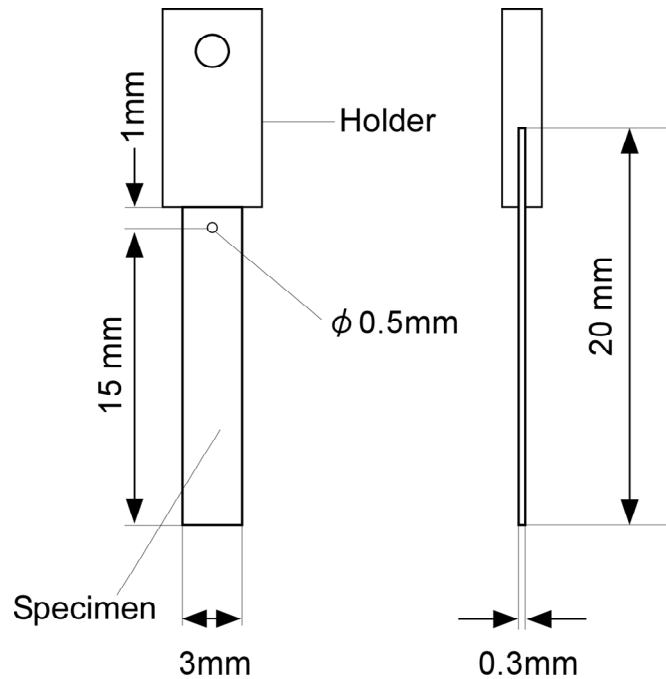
Shape and dimensions of fatigue test specimen.
